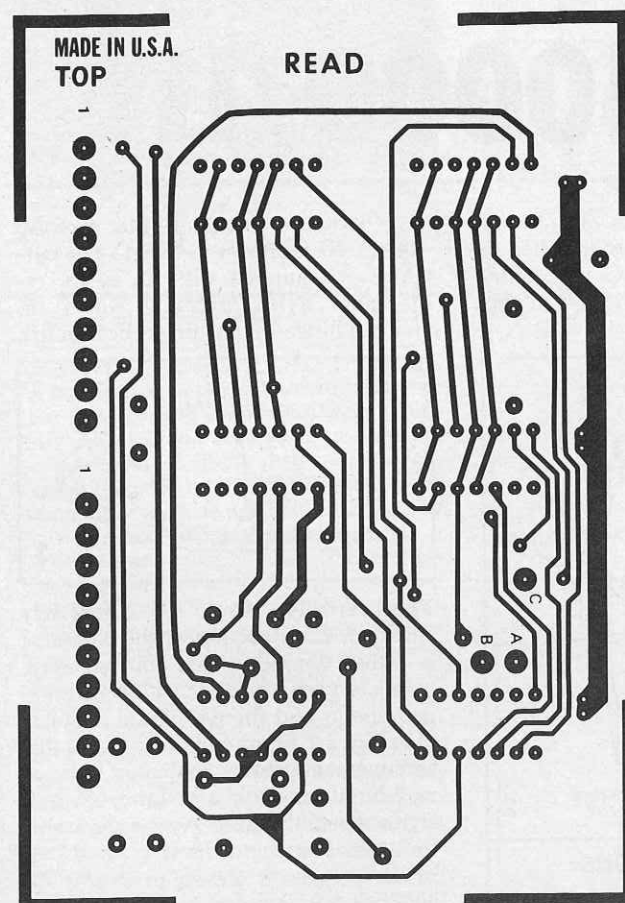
FOIL PATTERN for component side of double-sided board shown full size.
